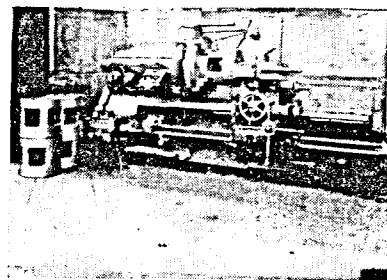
Lang 36" swing Surfacing and Boring Lathe.
